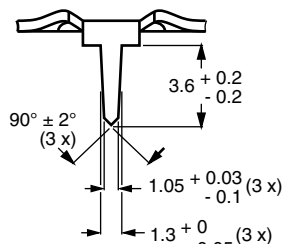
Mounting hole diagram and outline; form MR: With mounting ring and pins
